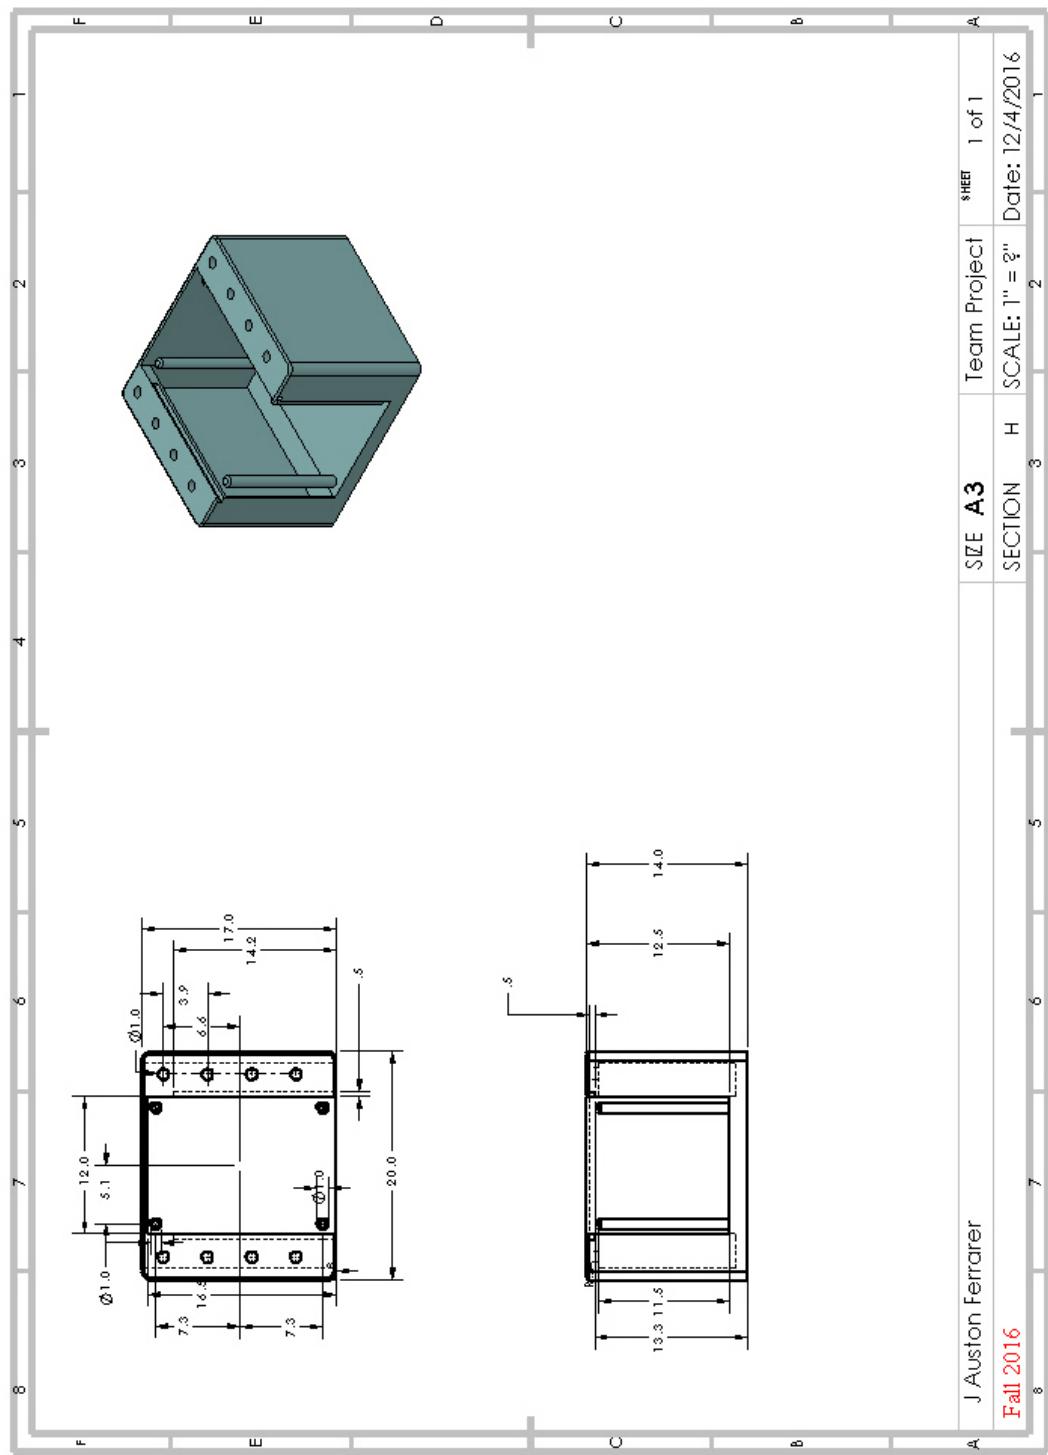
Ferrarer, Auston: Base Extrusion
